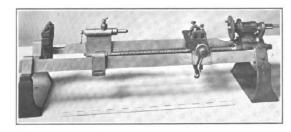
MAUDSLAY'S SCREW-CUTTING LATHE
